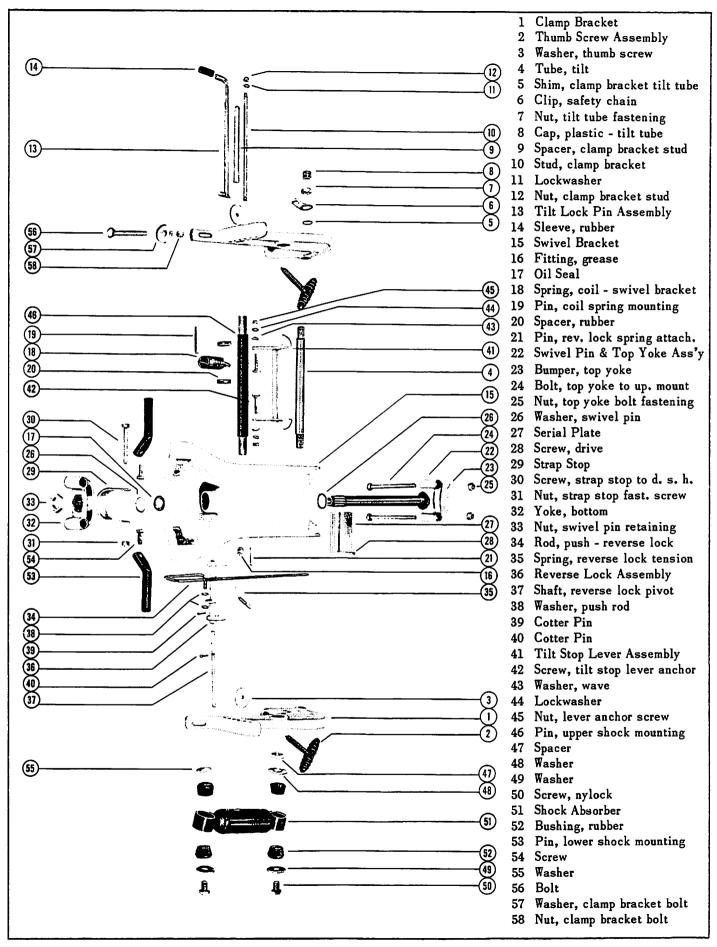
Clamp and Swivel Bracket Assembly, Mark 78A
